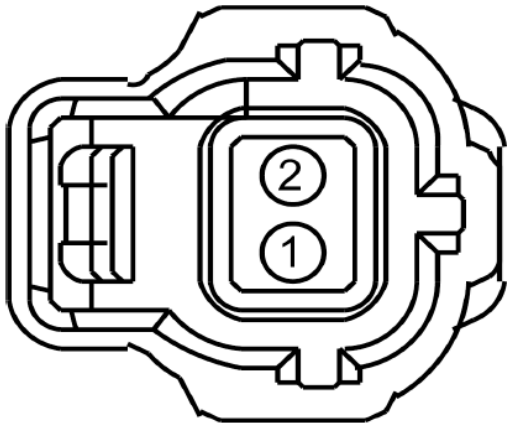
Engine Cooling Fan Motor Connector End View (C1048)
